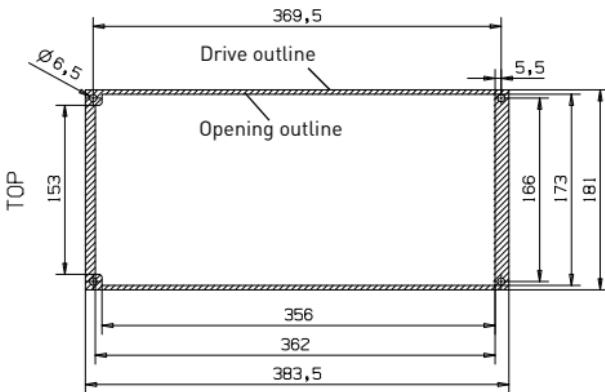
Flange mounting cutout dimensions for MI4 (unit of measure: mm)
